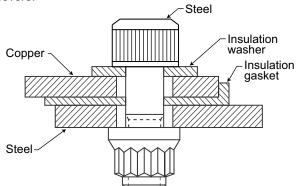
A method of electrically insulating a bolted joint to prevent galvanic corrosion.
